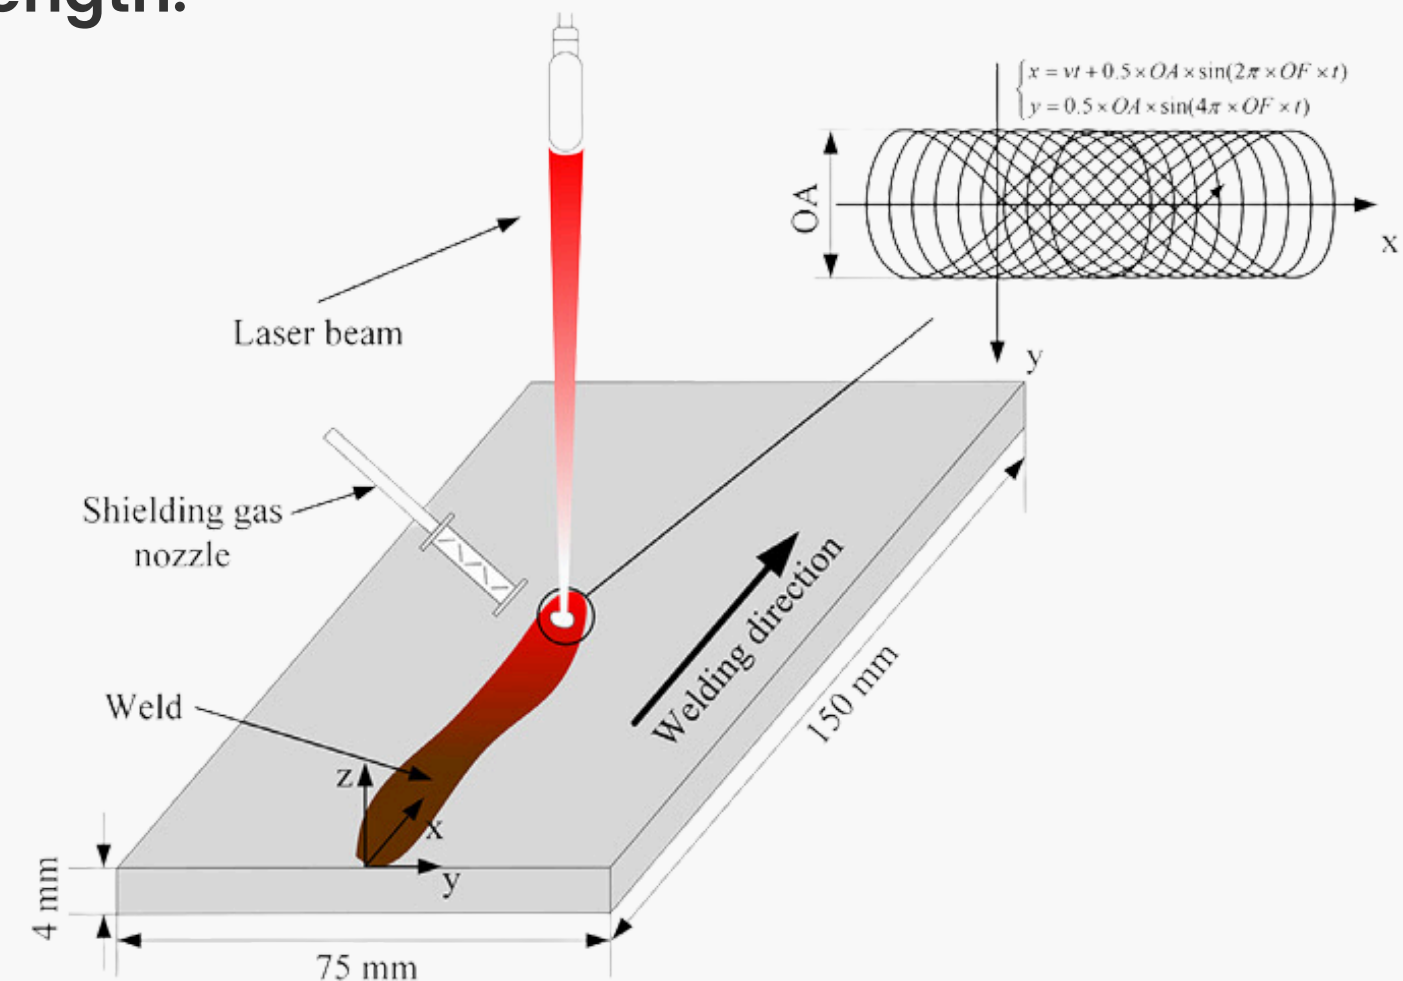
The schematic diagram of laser oscillation welding.
